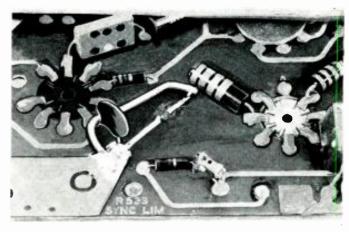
The method of repairing a break in printed wiring is shown here. A piece of hook-up wire is shunted across the break.
